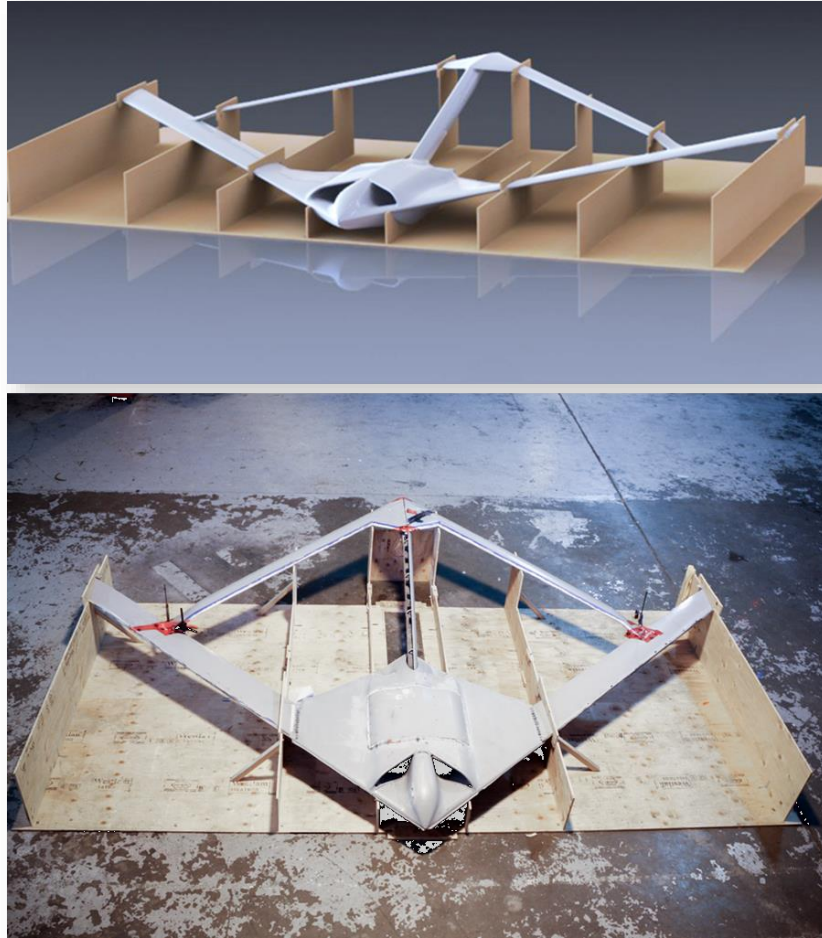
ASSEMBLY OF THE AIRCRAFT USING CUSTOM JIG
